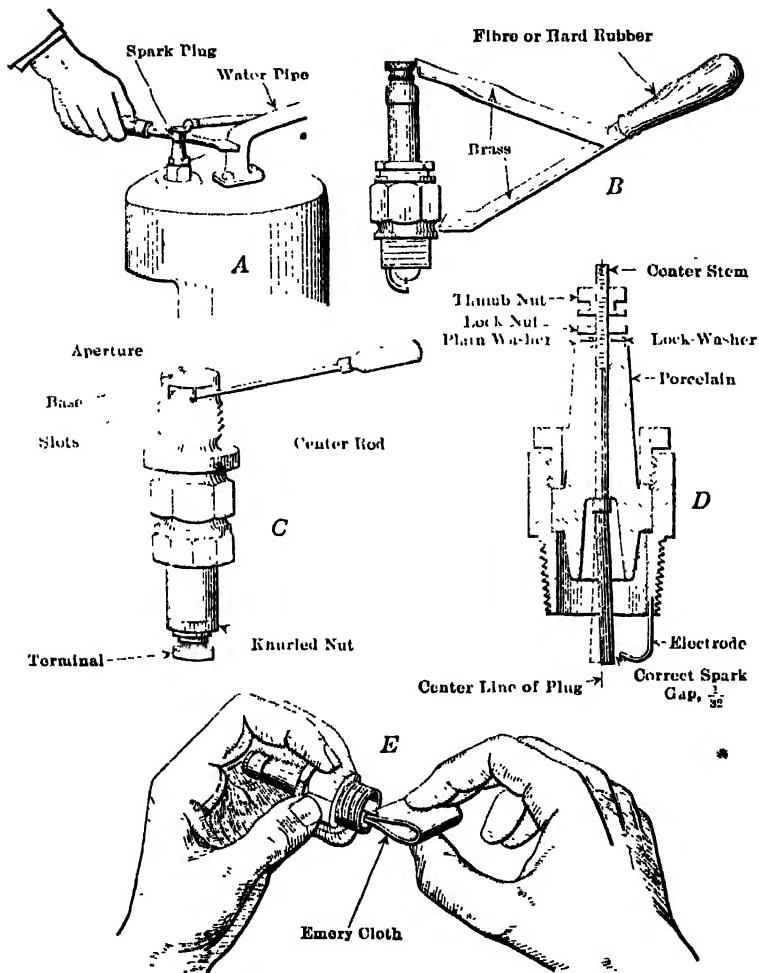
Showing Methods of Testing Spark Plug and Adjusting Air Gap Between the Electrodes.
